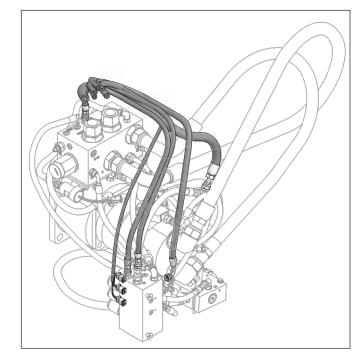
Hydraulic System Components, High-Performance Winch_2
